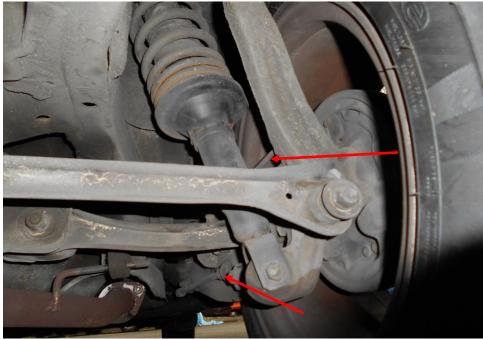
shows the various undercarriage components at the rear right wheel of the Motor Car. We did not observe any leakage of brake fluid at the time of our inspection of the Motor Car. Our visual inspection of the various mechanical components of the Motor Car's braking system revealed all to be intact without visible damage.
